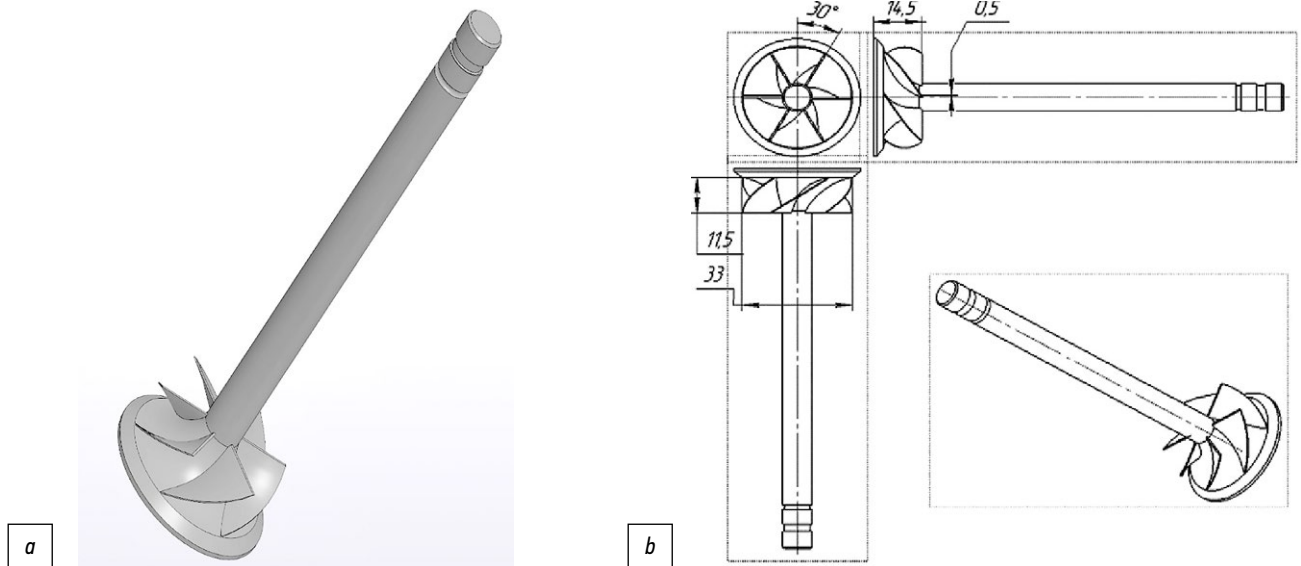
View of a valve with three guides (blades): *a*, 3D model; *b*, main dimensions of the guides (blades).
